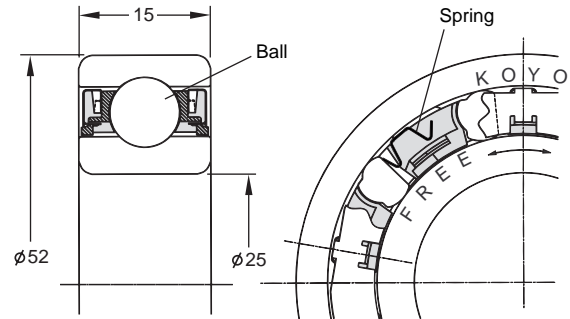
Structure of one-way clutch with built-in ball bearing WCB6205
